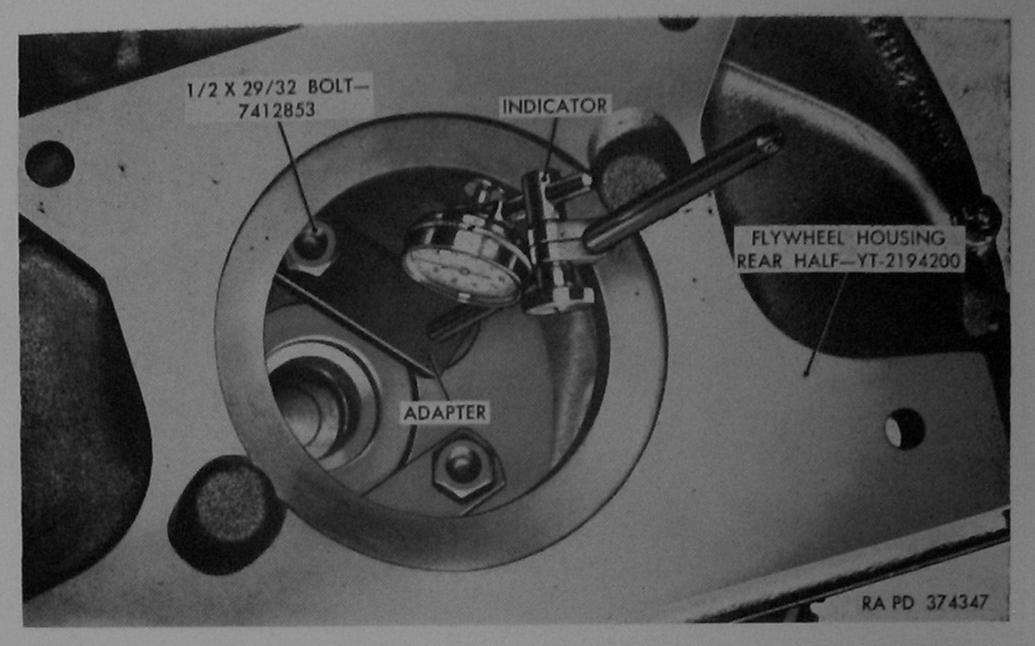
Checking flywheel housing pilot bore—engine assemblies 7411599 and 8329440.
